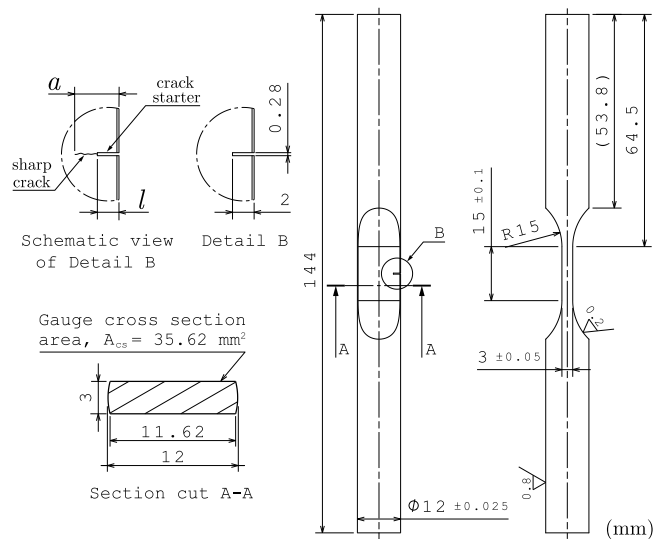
The single edge crack tension, SET, specimen used for thermomechanical fatigue crack propagation testing. The measurement of the crack length, a , and the crack starter length, l , is shown in the “Schematic view of Detail B”. The gauge cross-section area, A_{cs} , with no sharp crack and no crack starter is shown in the “Section cut A-A” [18].
